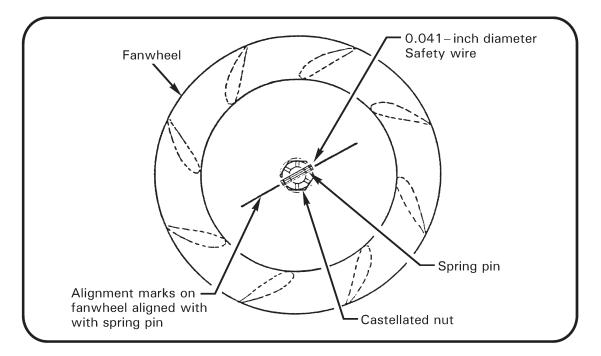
FANWHEEL ALIGNMENT MARKS
